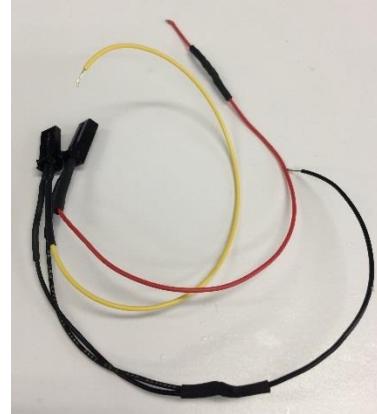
Ground wires soldered together, bare metal covered in heatshrink wrap
